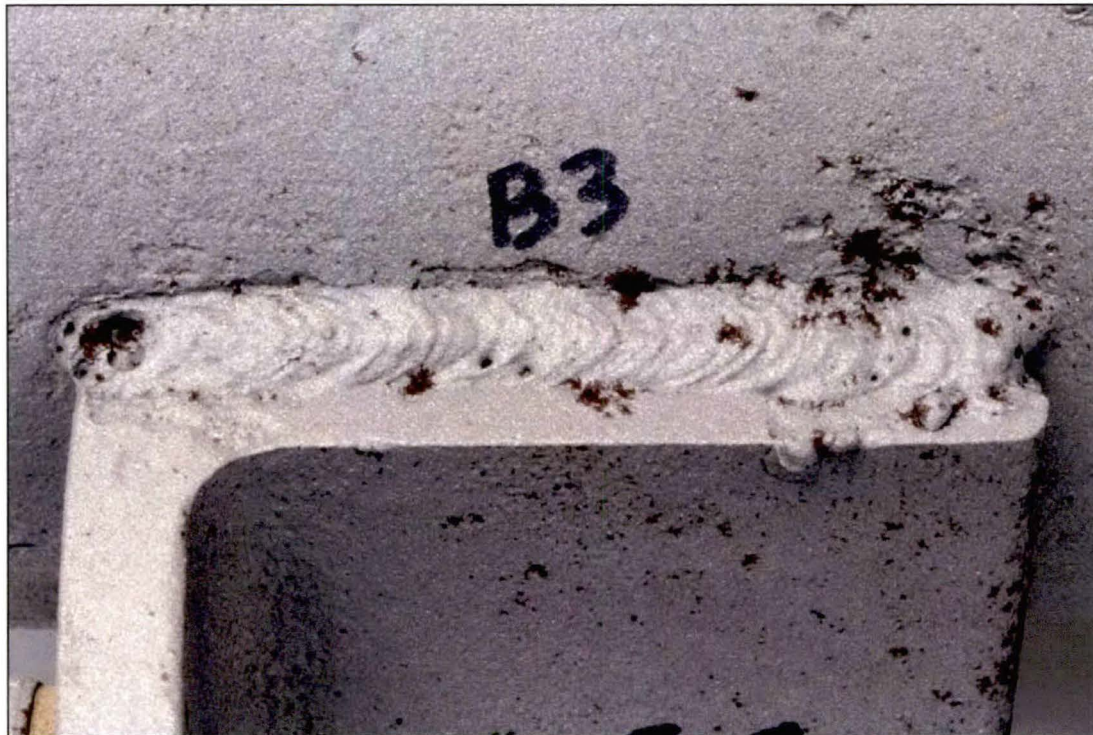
Image of the Lug B3 top weld showing spatter and porosity.
